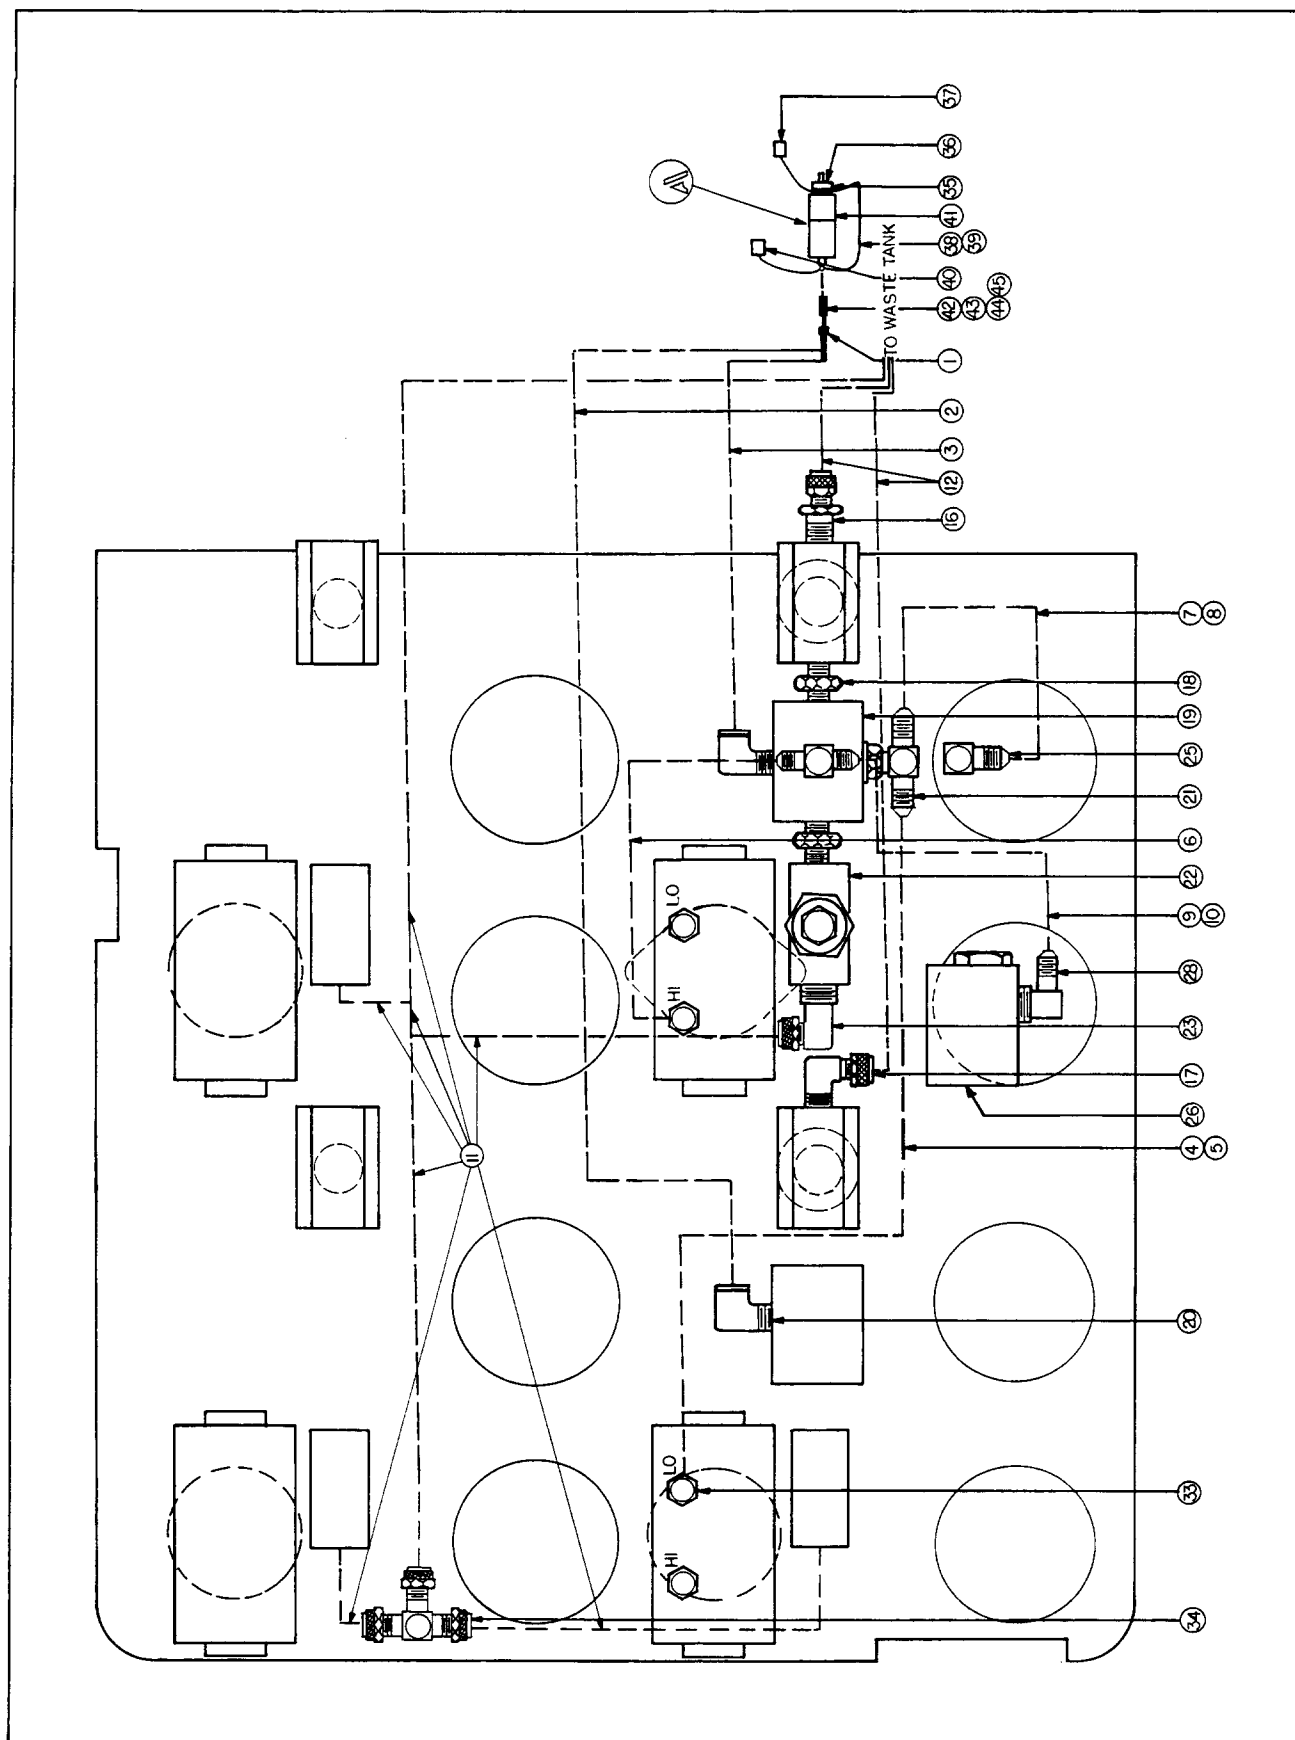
Panel Assembly (Sheet 2 of 3)
